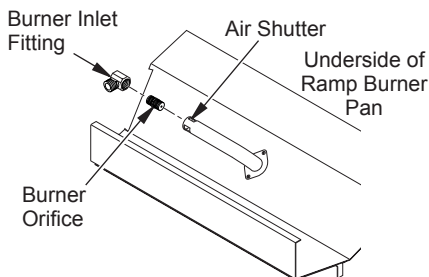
Checking Gas Joints (Propane/LP Gas Only)
